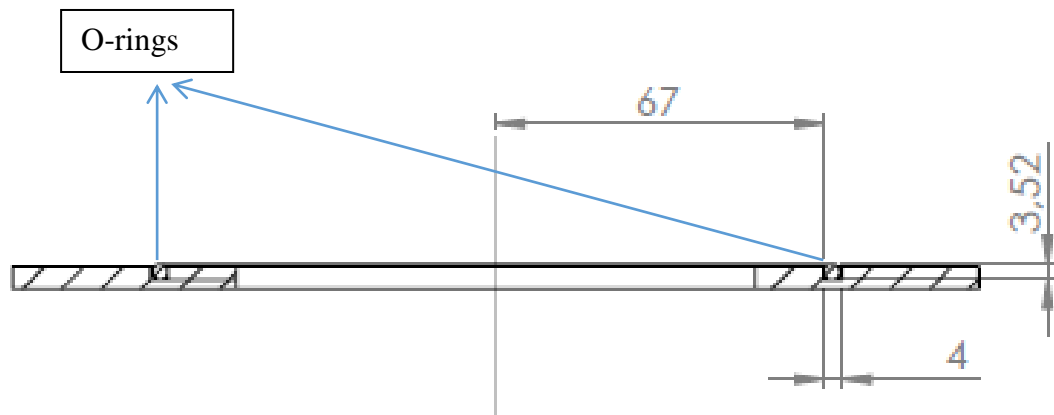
Technical Drawing of O-ring, Flange Assembly Cross Sectional View (in mm)
